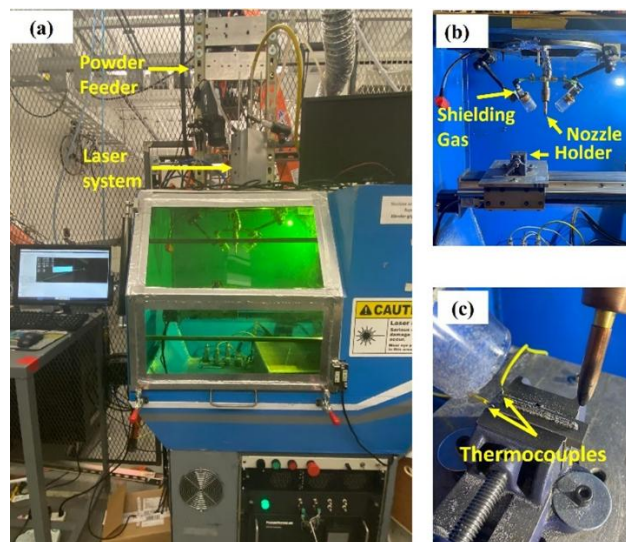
Experimental setup used for the laser DED process, showing (a) the overall DED system equipped with a 1 kW Nd:YAG laser and powder feeding system, (b) close-up view of the off-axis powder-feeding nozzle assembly and shielding gas arrangement, and (c) placement of two K-type thermocouples on the substrate to capture thermal histories during deposition.
